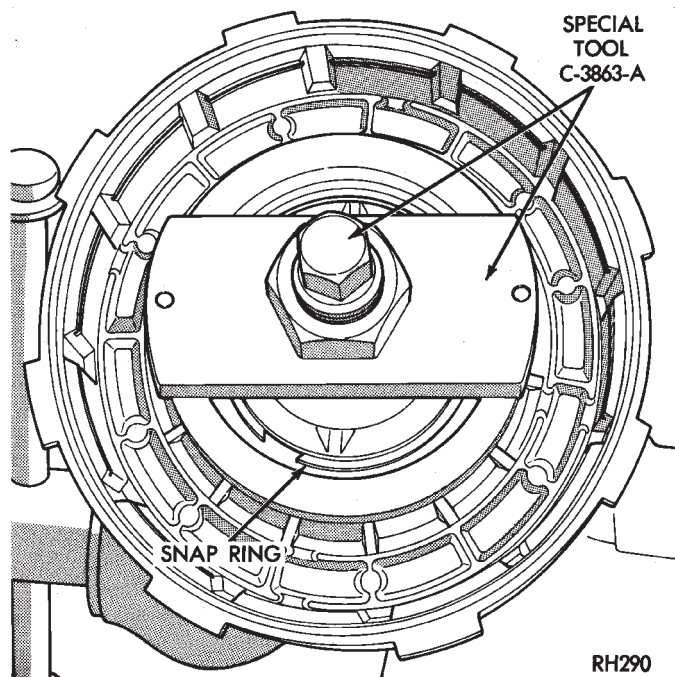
Removing Front Clutch Spring Retainer Snap Ring
